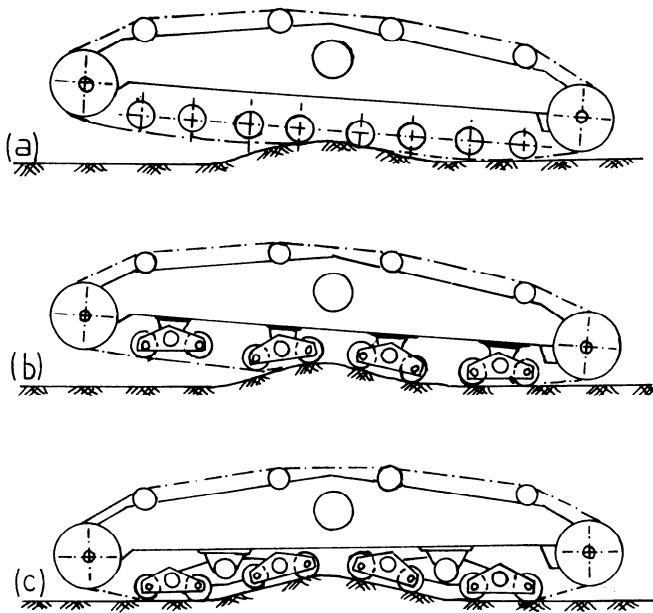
Continuous excavator crawlers (courtesy: Friedrich Krupp GmbH Maschinen und Stahlbau Rheinhausen).
